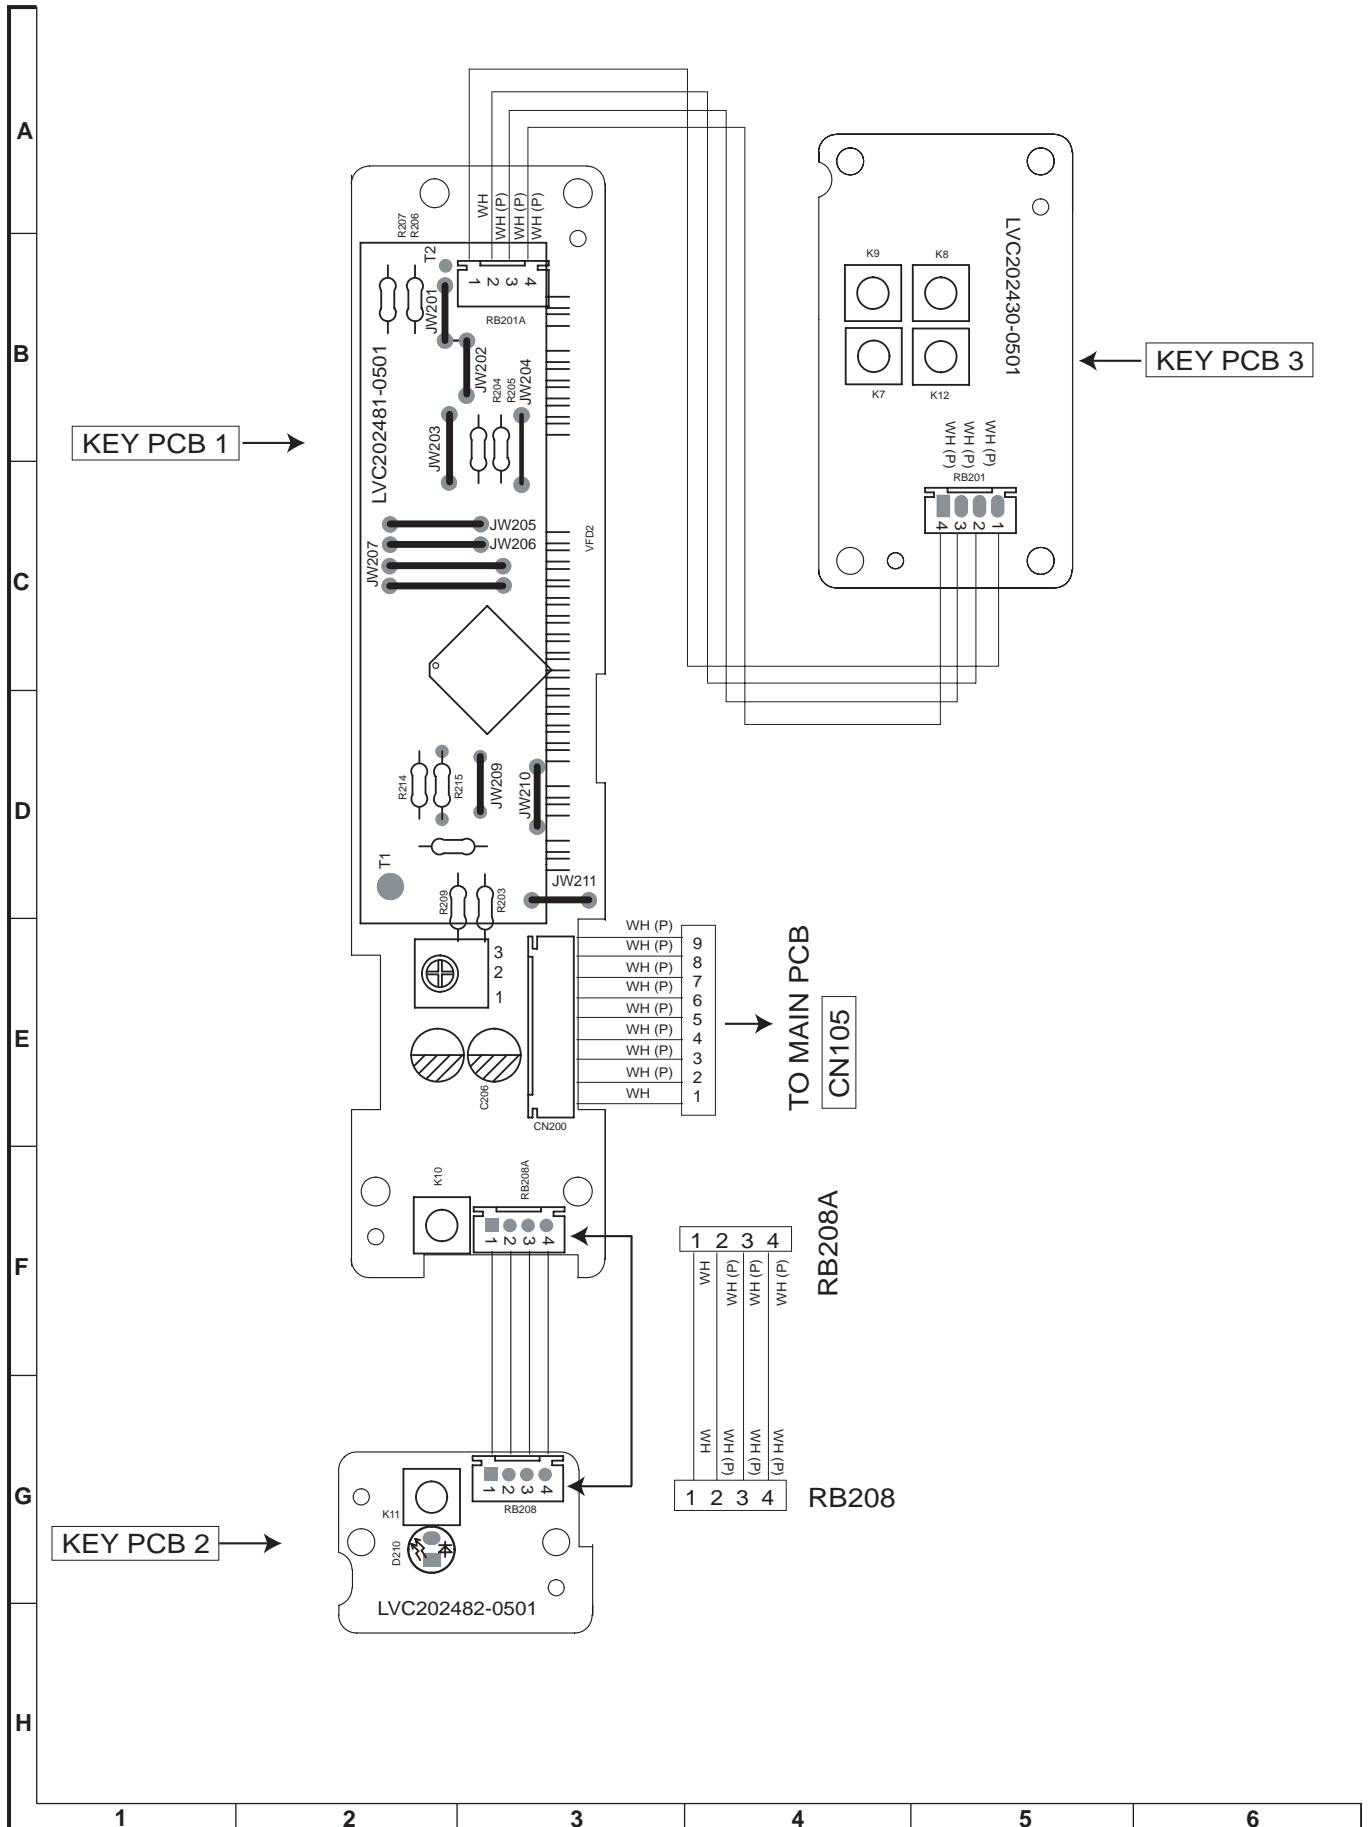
WIRING SIDE OF KEY PCB (TOP VIEW)
